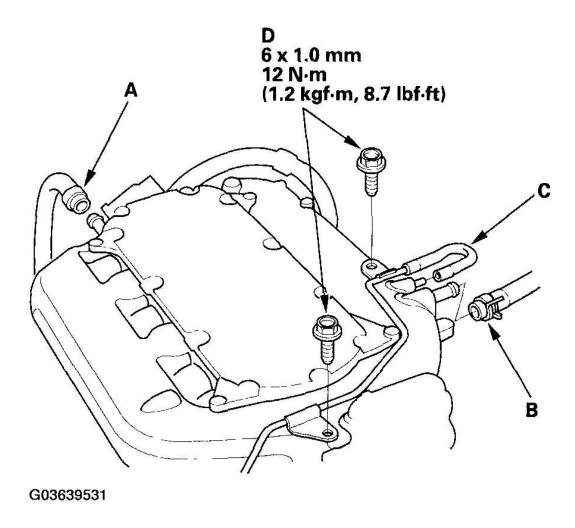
Installing Positive Crankcase Ventilation Hose Courtesy of AMERICAN HONDA MOTOR CO., INC.
